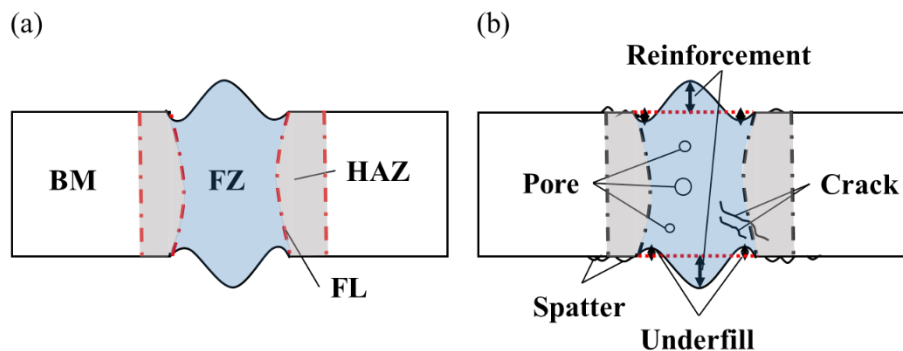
(a) Distinct weld regions: FZ, fusion line (FL), HAZ, BM. (b) Weld seam imperfections.
